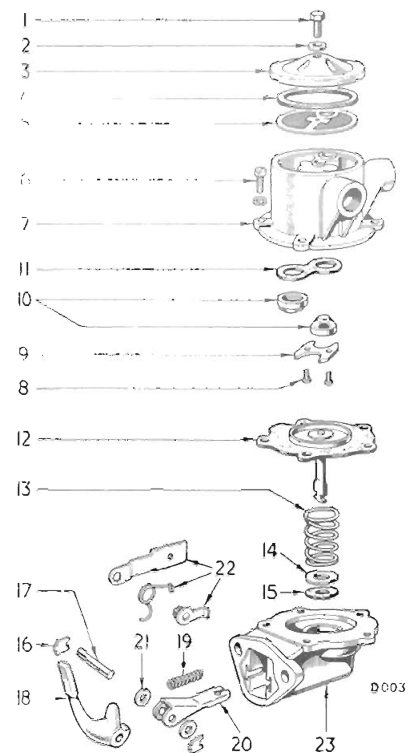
Exploded view of Spitfire and Herald 1200, 12/50 fuel pump
